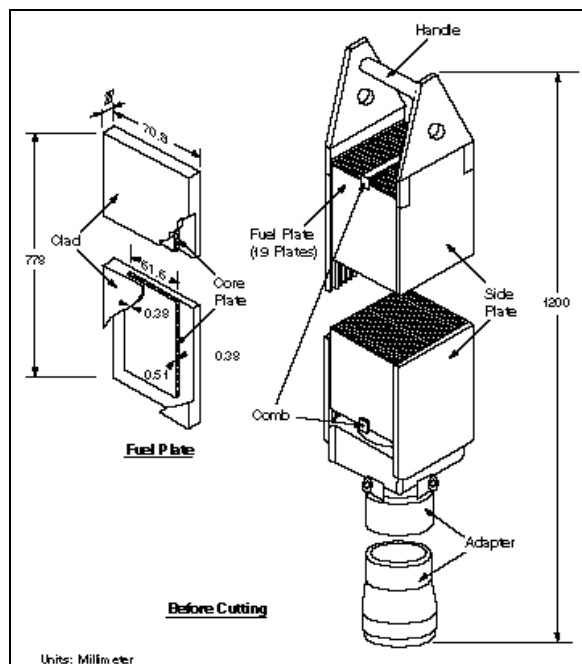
Typical Materials Test Reactor fuel assembly.
